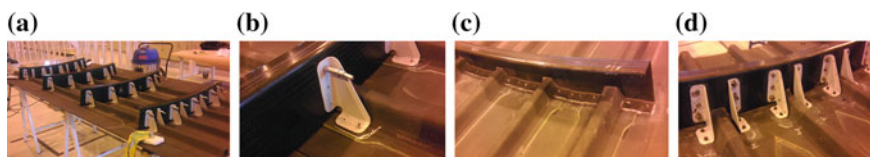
Frame assembly sequence on lower panel—a Frame positioning (dry fit check). b Cleat placement. c Liquid shim application. d Wet installation of fasteners
